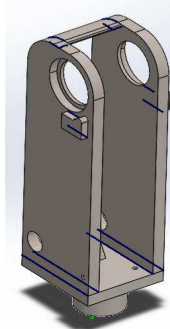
Demonstration of the location of the lower leg part's welding seams
